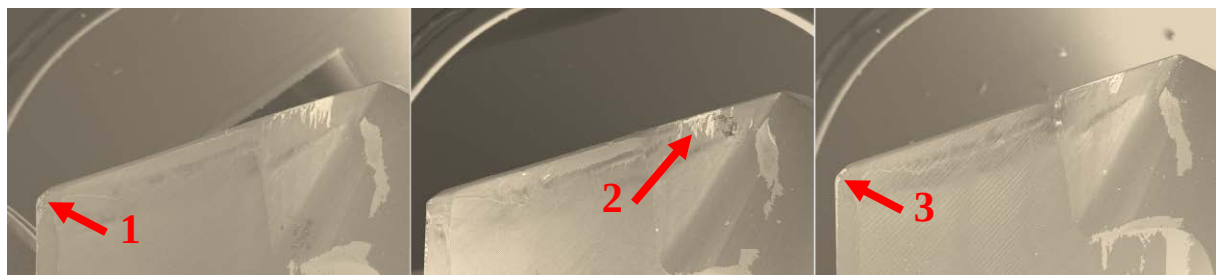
Honed tools: 1-Machined 1,400 bores; 2-Machined 1,000 bores; 3-Machined 1,100 bores
